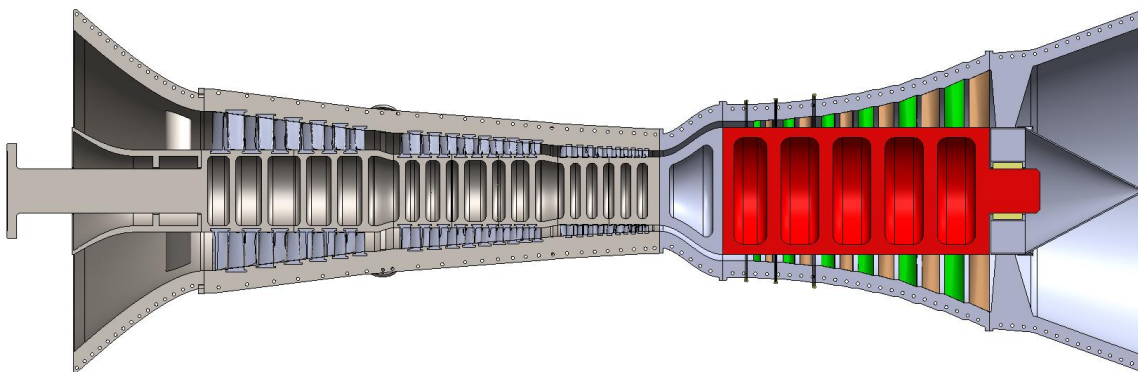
UHEGT, cross section of the complete assembly. The assembly consists of three main components: Compressor on the left, connection piece in the middle, and turbine on the right.
